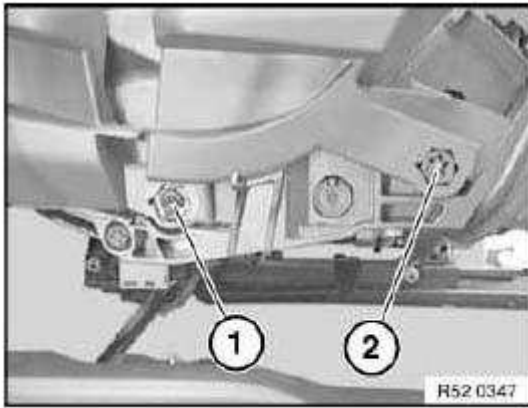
Adjusting Screws And Eccentric Disks (Actuating Unit Version A)
